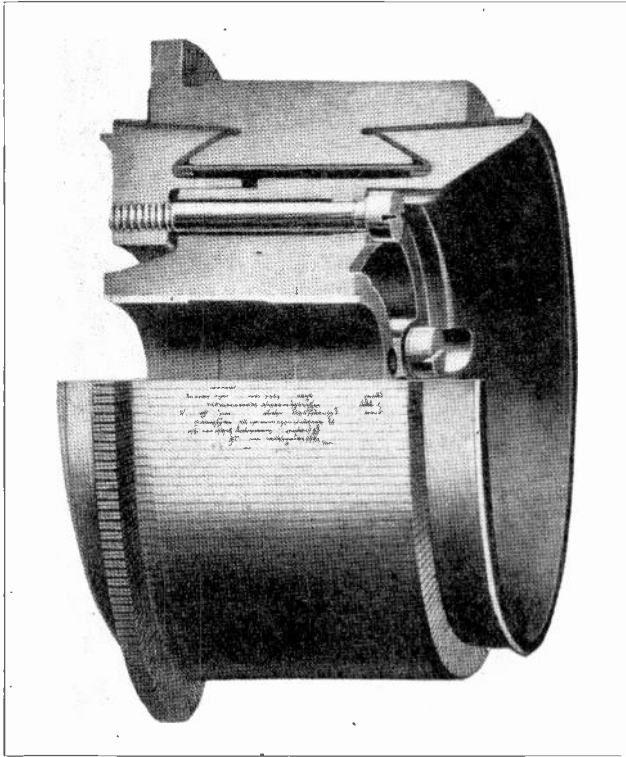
This view shows another type of commutator in which the bars are held in place by bolts that are used to draw the clamping rings tight.
